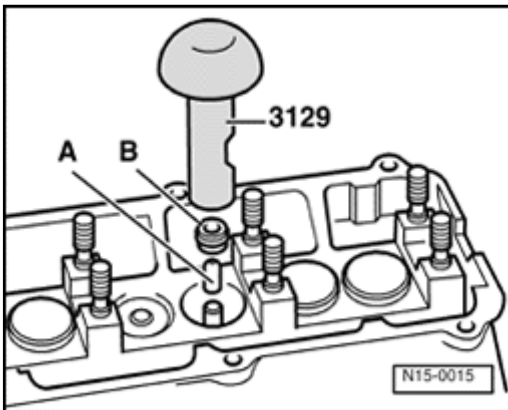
Identifying Plastic Sleeve, Valve Stem Seal & Seal Driver Tool 3129
